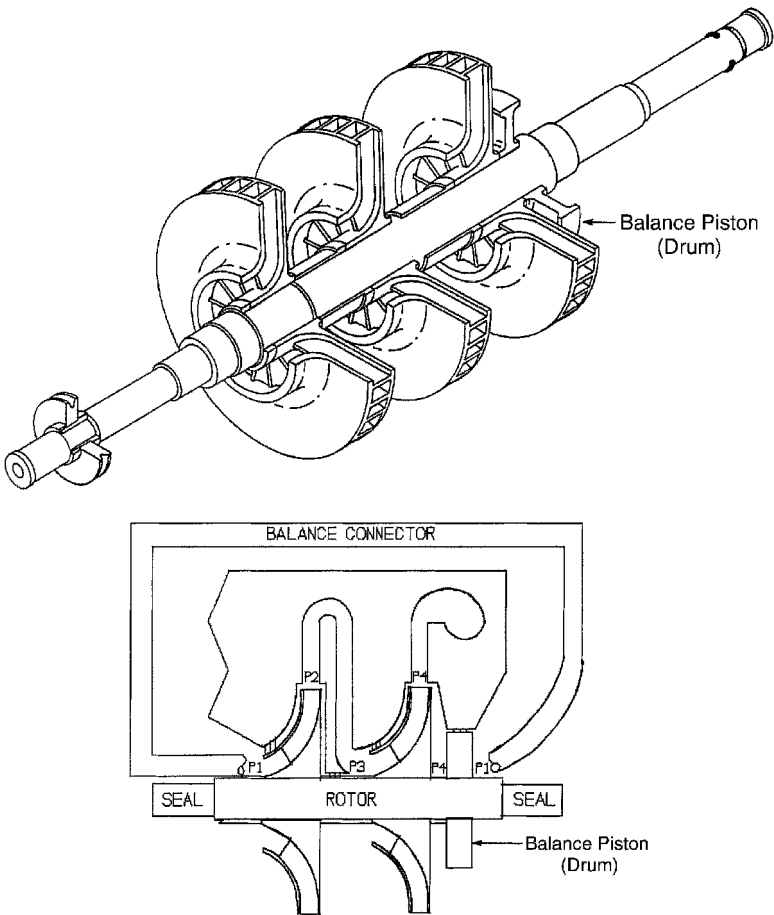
Balancing drum serves to modify axial thrust developed by differential gas pressures in compressors. (Dresser-Rand Company, Olean, N.Y.)
